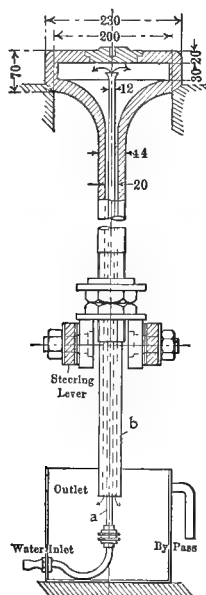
Pawlikowsky Method of Cooling Exhaust Valves.
